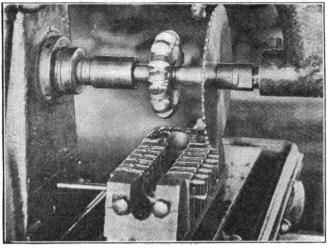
MILLING INSIDE OF FRAMES AND CUTTING ENDS OF STEMS
